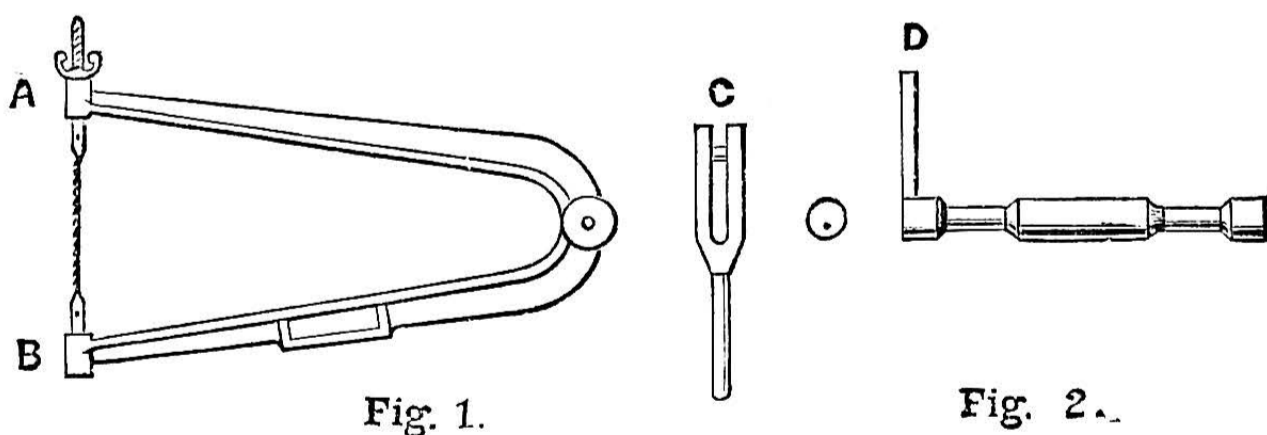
Saw-Frame. Fig. 2.—Eccentric.
